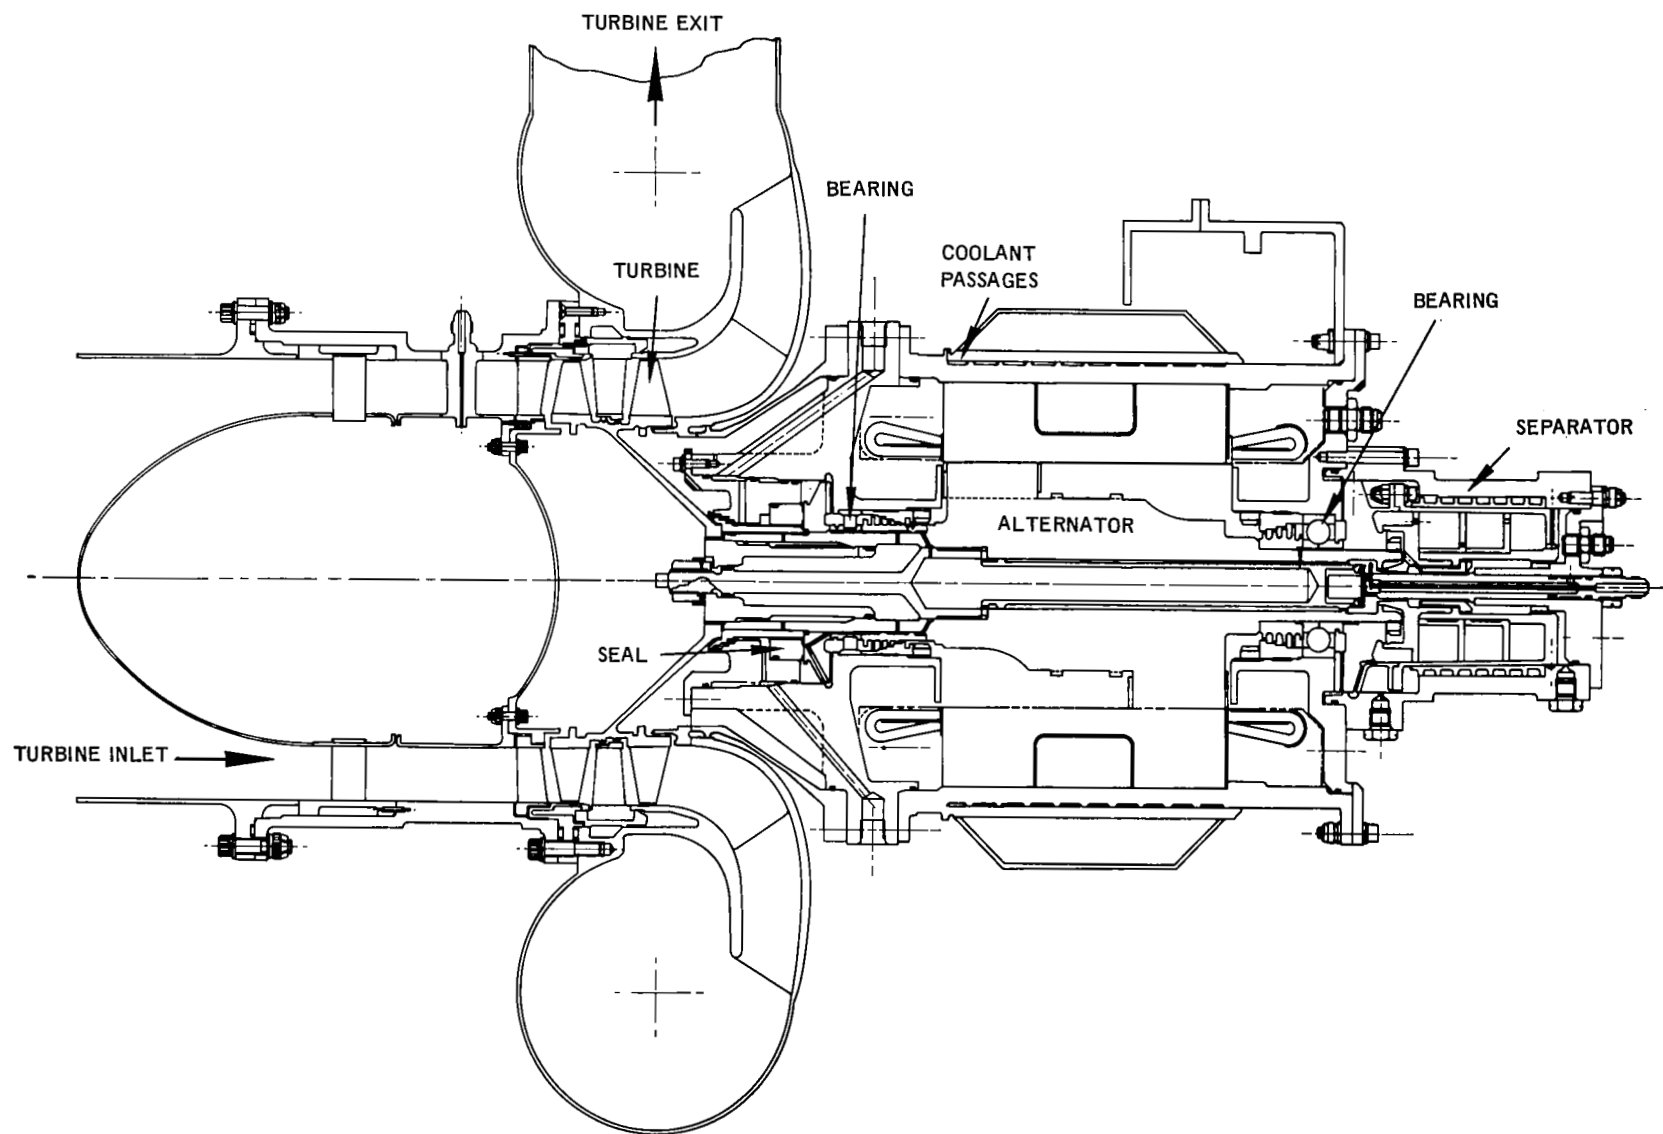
Brayton-Cycle Turboalternator with Rolling-Contact Bearings
